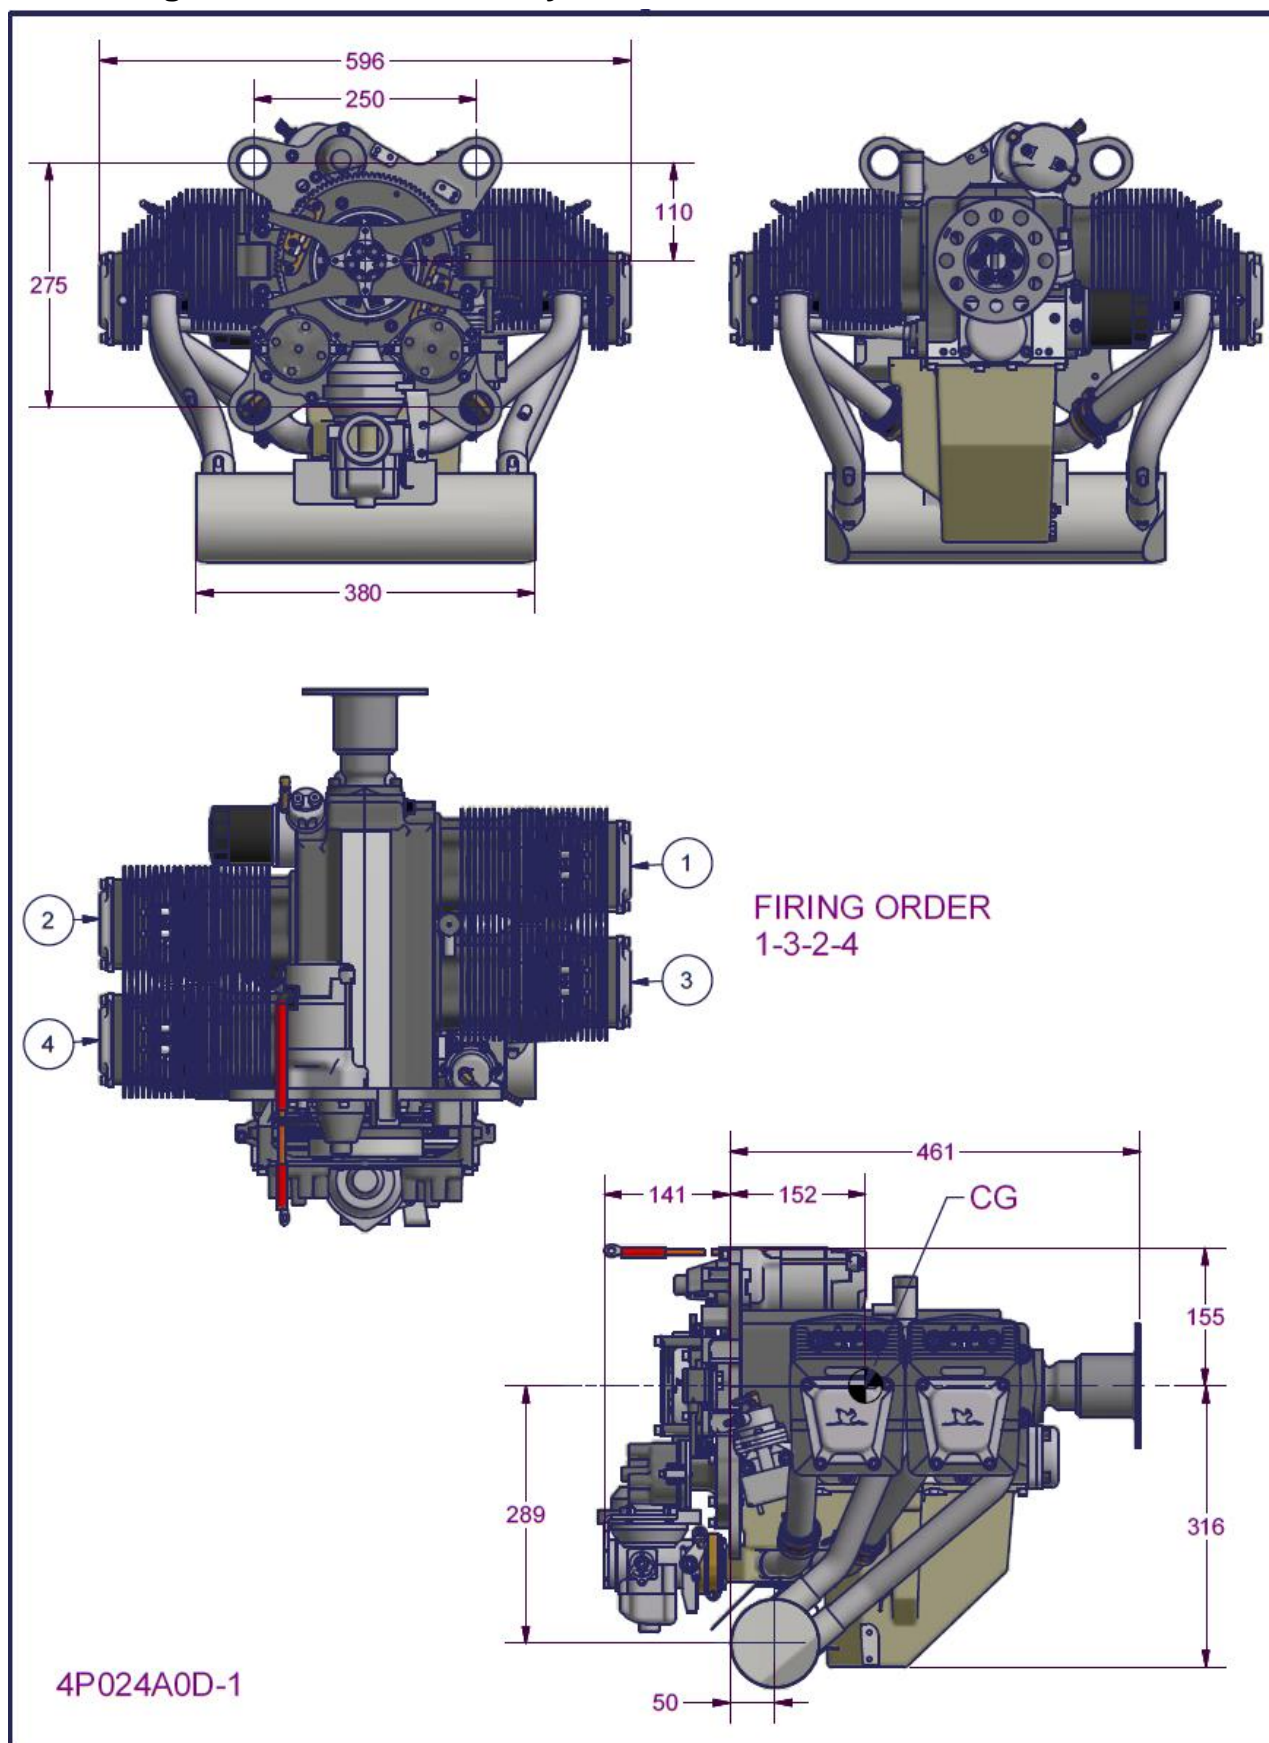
2200 Gen 4 Engine dimensions and layout
